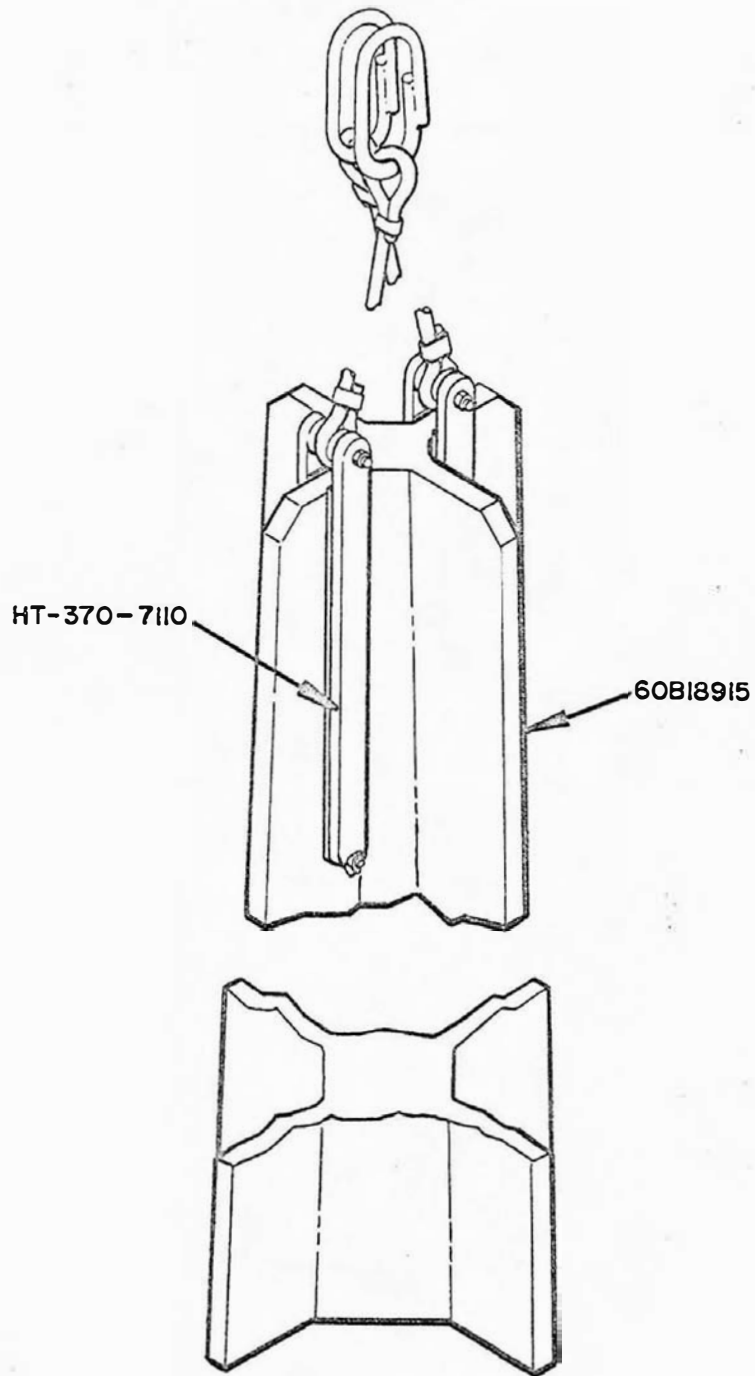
Center Engine Post Hoisting Tool HT-370-7110
